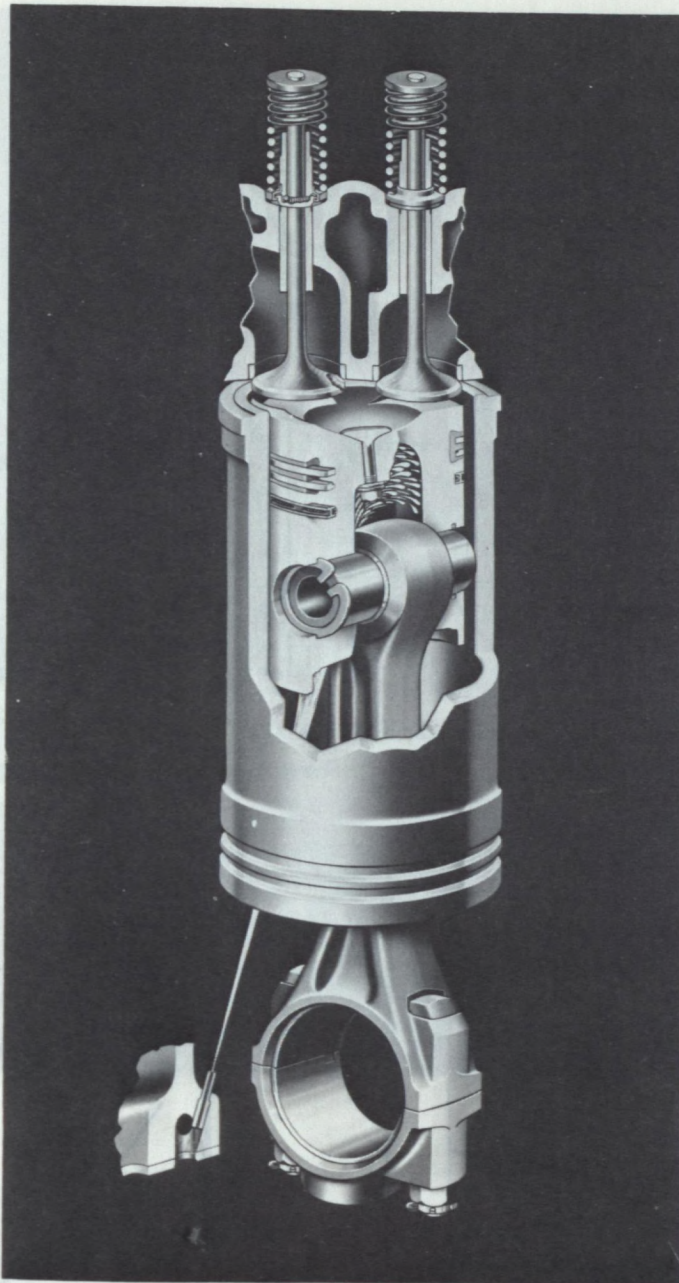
Piston-liner assemblies, 1200 RPM engine.
